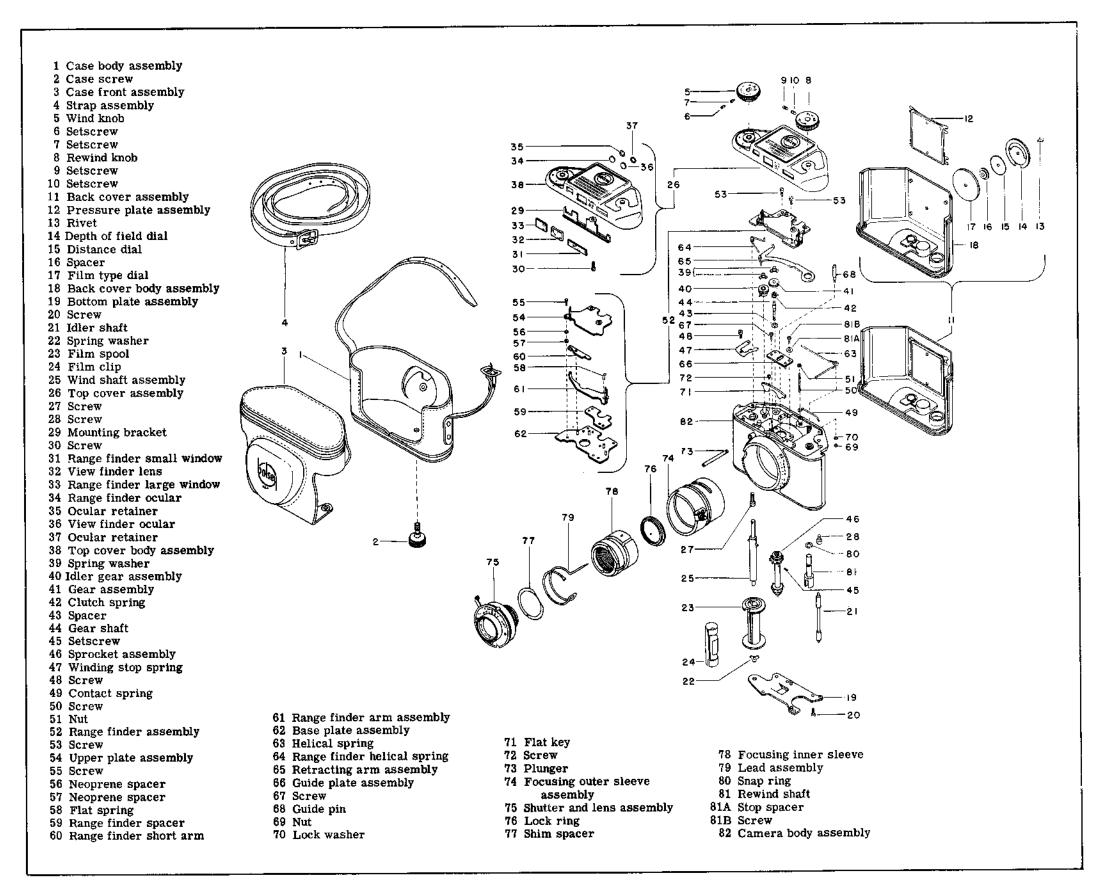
Exploded View, Camera, Ground, 35 Millimeter, Bolsey Model B2
